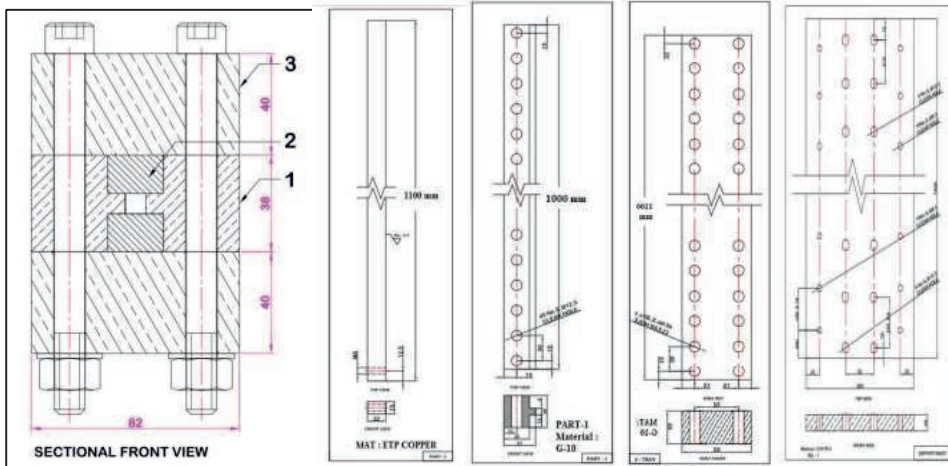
(a) Rail-gun assembly, (b) Copper bars, (c) Side support, (d) Top and Bottom Support and (e) Base Plate.
